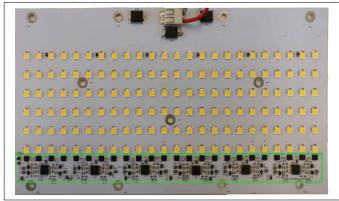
Aluminum LED pcb board with integrated current sharing controller. The control section is highlighted in green.
